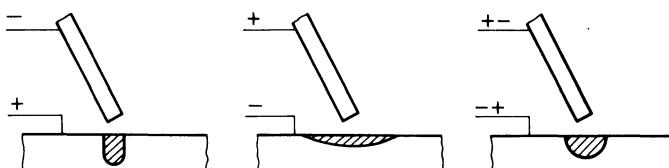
Penetration of arc welds: (a) direct current, straight polarity (deep and narrow) weld; (b) direct current, reverse polarity (shallow and wide) weld; (c) alternating current (medium deep) weld
